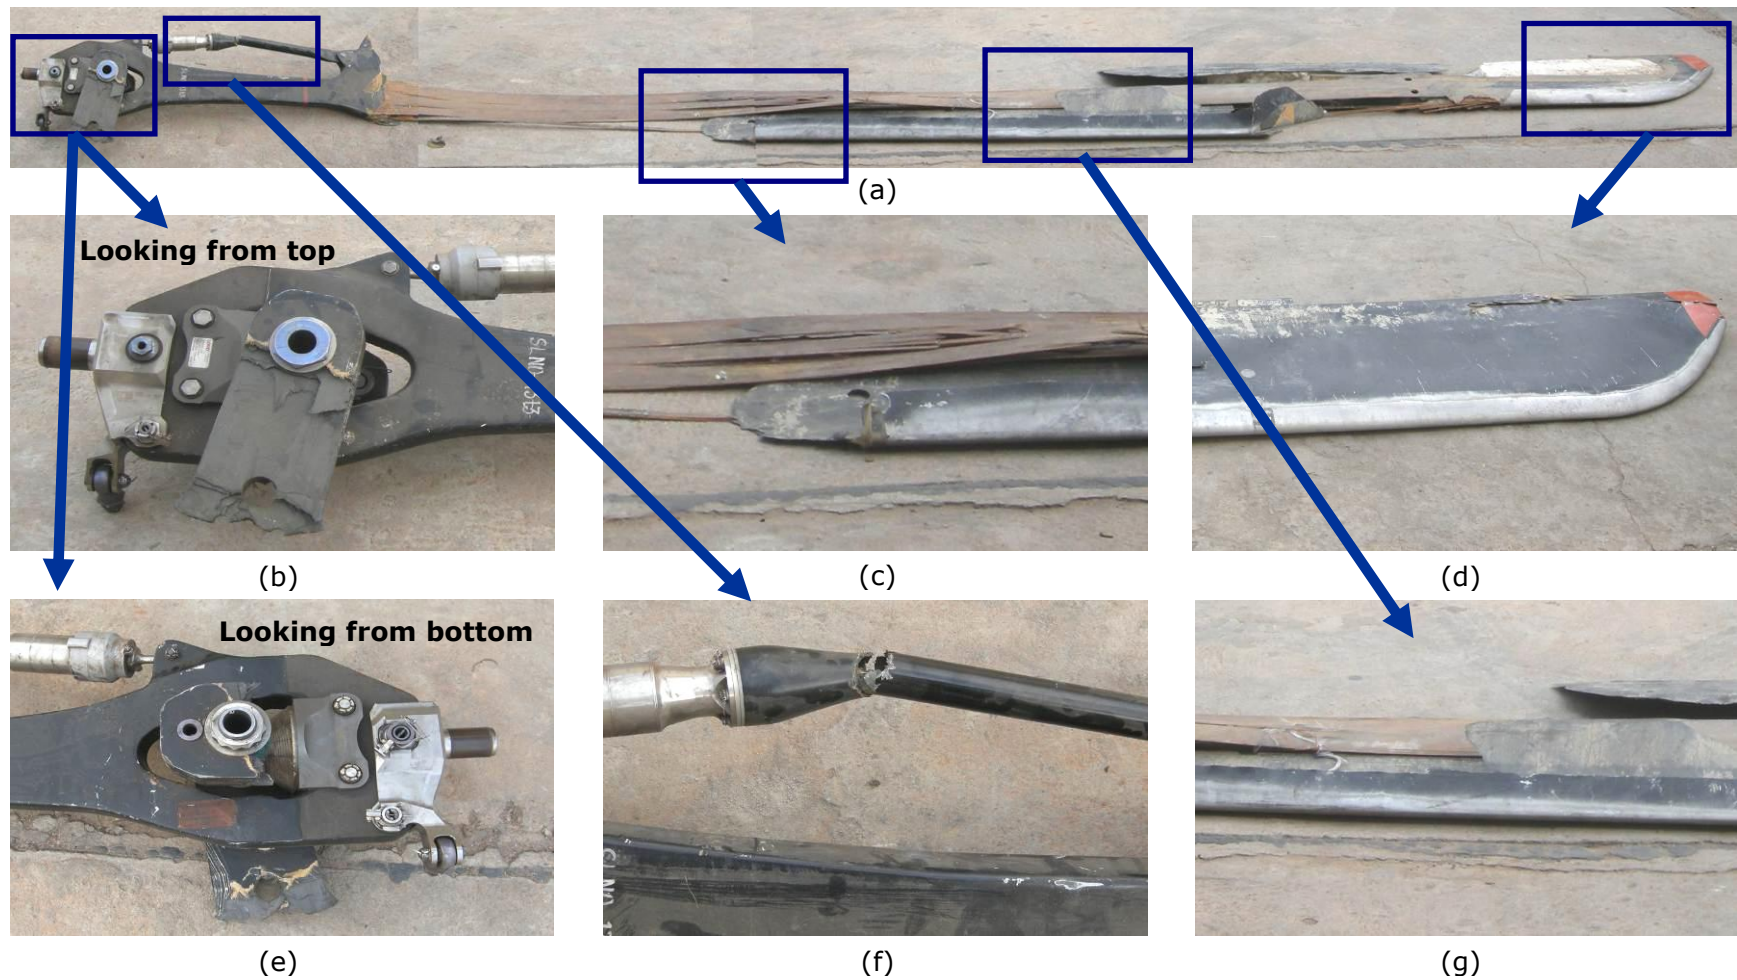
Photographs of the red main rotor blade showing: (a) full blade assembled with available parts, (b) failure pattern in top hub plate, (c) blade spar, (d) tip of the blade with airfoil, (e) failure pattern in bottom hub plate, (f) broken damper rod, and (g) a part of the leading edge of the airfoil retrieved from the wreckage site; note no hit marks on the available parts of the blade
